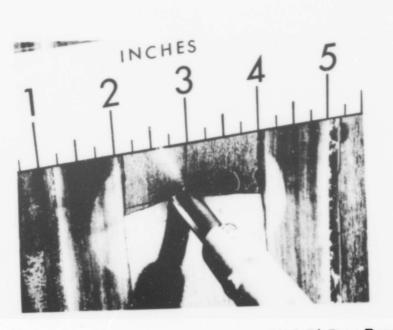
Typical Crack Arrest Behavior of 7075-T6 Bare Panels With Two 0.75-Inch by 0.010-Inch 1002-S Fiberglass Straps on Impact Side of Specimen.
